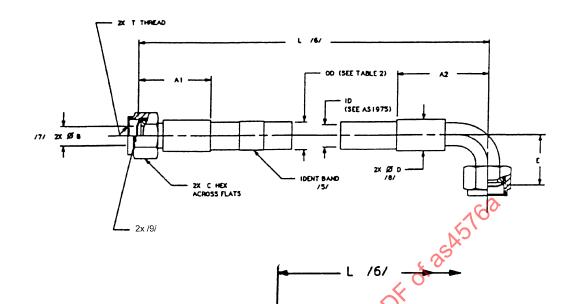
ENLARGED VIEW - STR END FITTING
